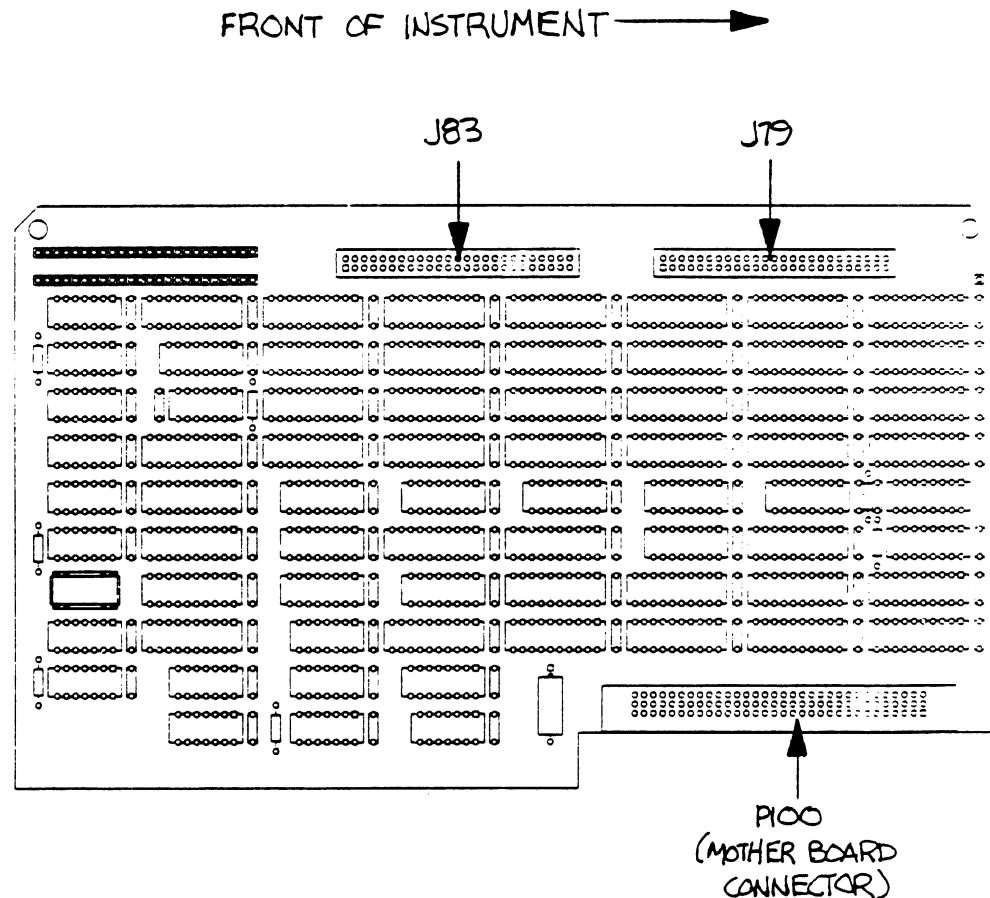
Connector locations for removal of the A16 Waveform Compressor Board.
